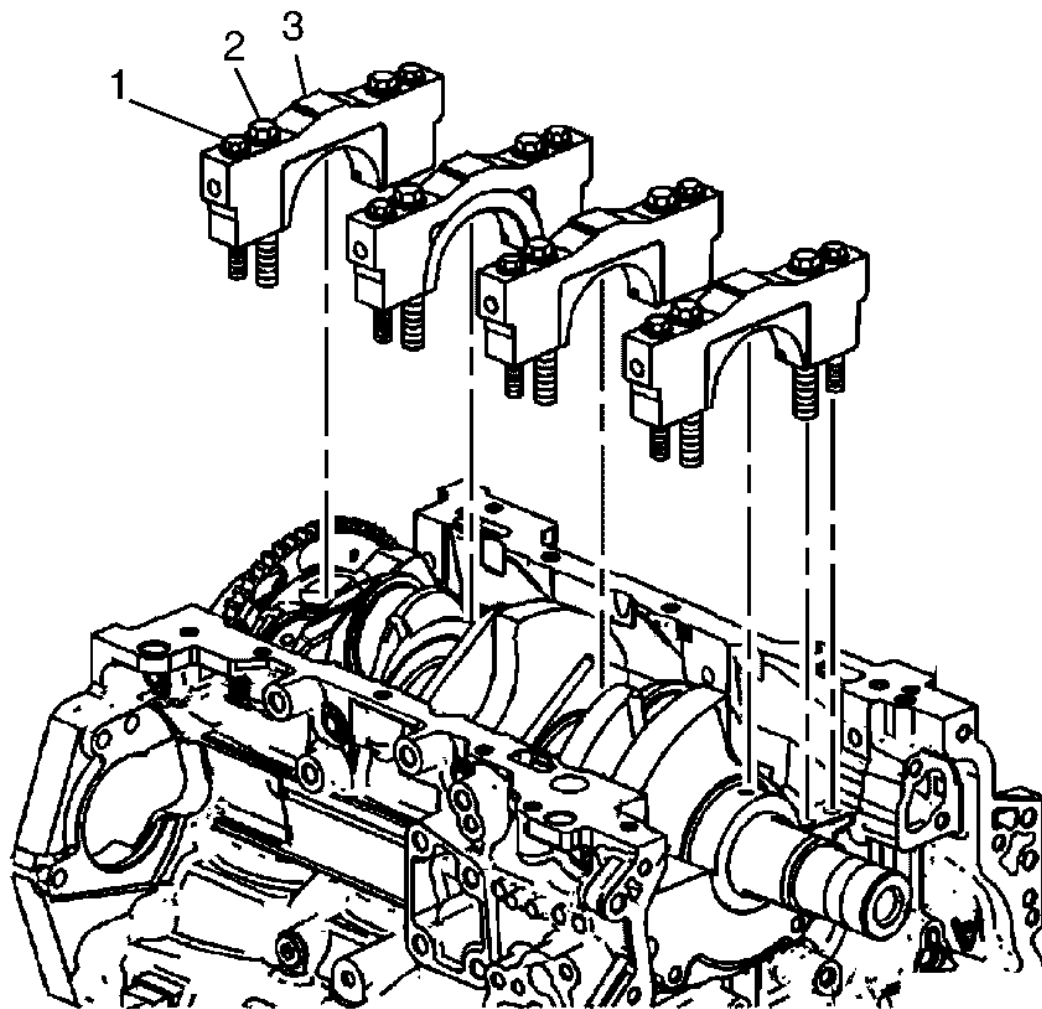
View Of Crankshaft & Cylinder Block
